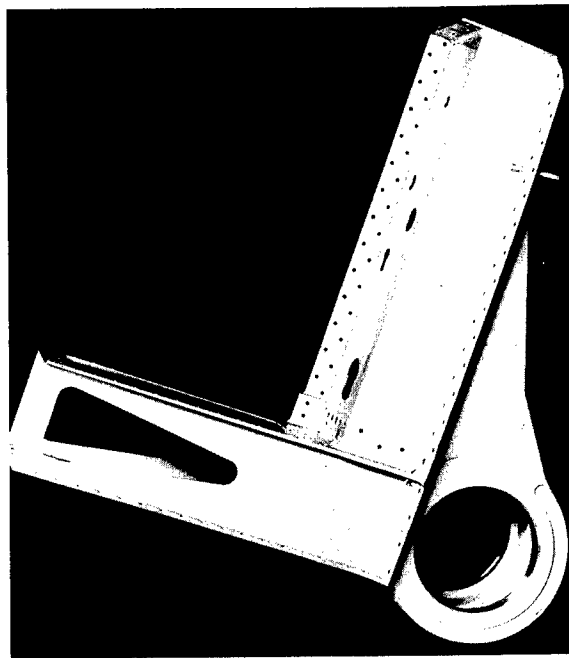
Wing hinge fabricated by welding a combination of maraging sheet and forgings. (Photograph supplied by Vasco, a Teledyne company.)
